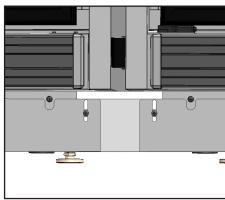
Installed front kickplate supports, kickplate junction pieces, and front kickplate.
